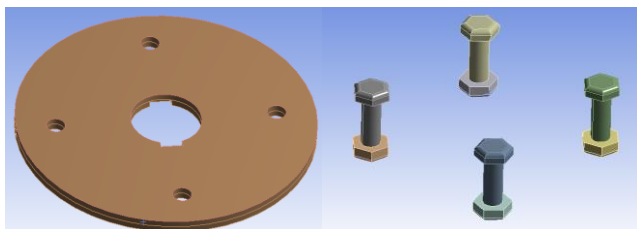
CAD model of Gasket Fig. 7. Nut and Bolt assembly
